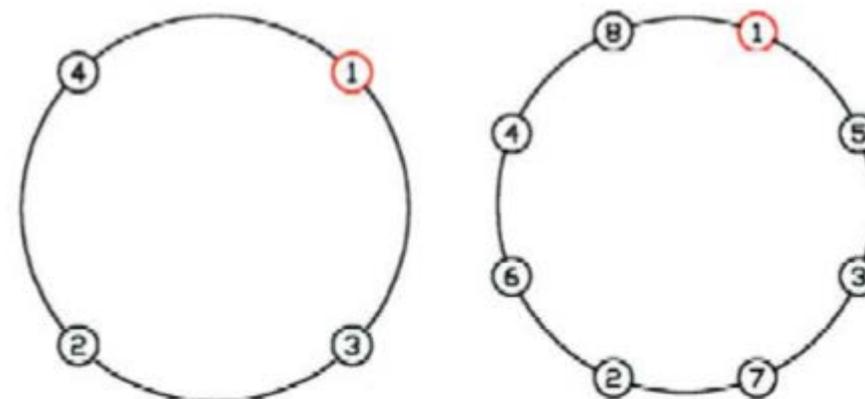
2 Bolt Tightening Sequence 4 and 8 Bolts
